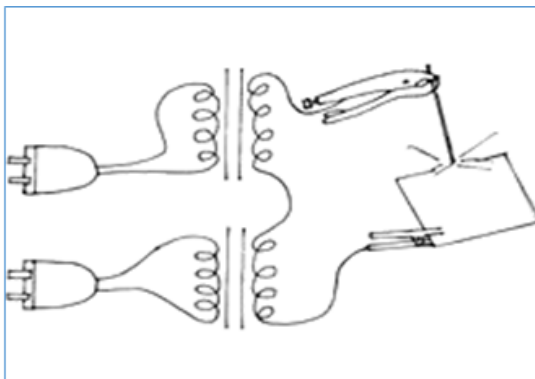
Schematic showing the connection of weld process by connecting two transformers in series [12].
